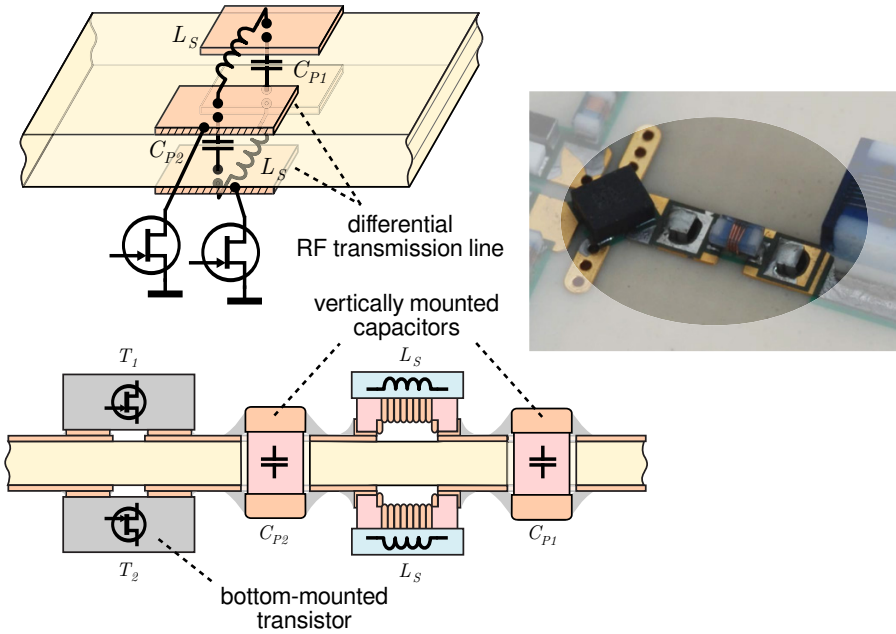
Cross section of PCB with switching transistors mounted on either side of the board
